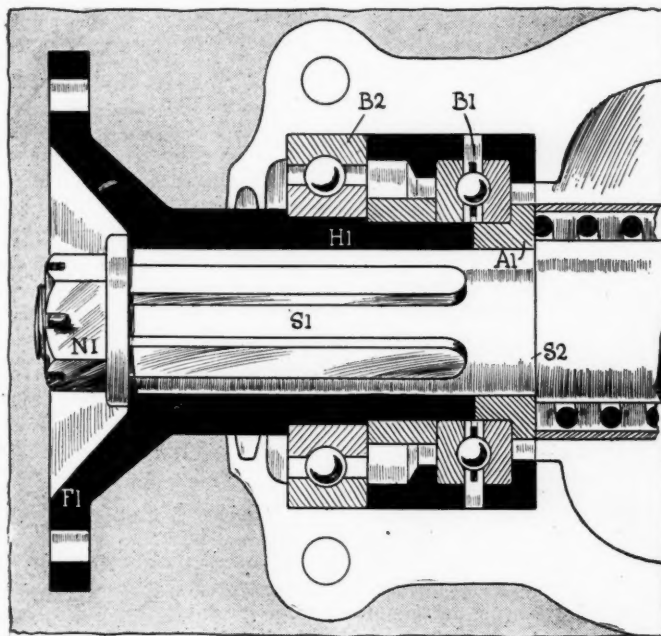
Flanged coupling of gearset shaft in 18-horsepower Panhard. The motor or clutch shaft carries a similar corresponding flange
